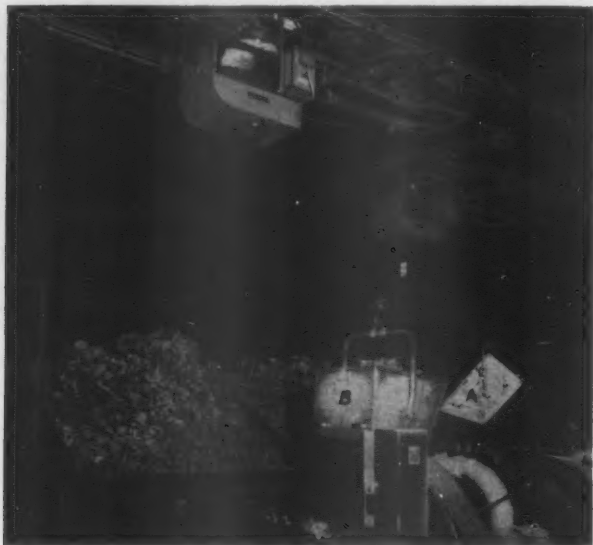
DUMPING CASTINGS FROM SHAKE-OUT ON SORTING TABLE (A) AND INSPECTED CASTINGS (B) BEING TAKEN TO TUMBLING BARRELS.
